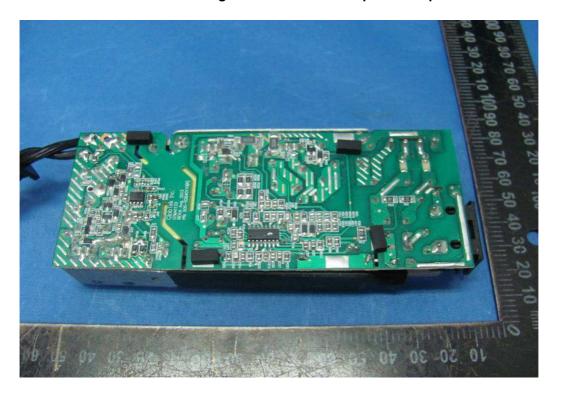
GT\*41133 series Component side view of PCB for open frame model
